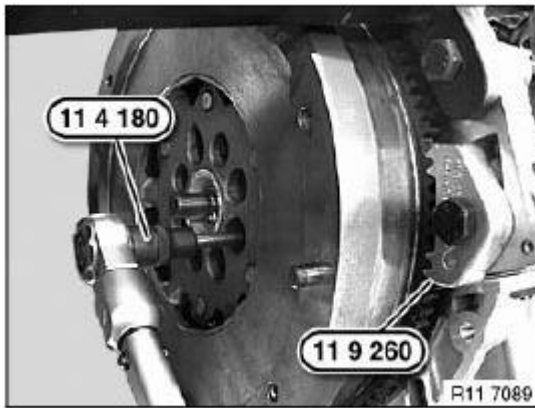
Releasing Flywheel Screws Using Special Tool (11 4 180)
